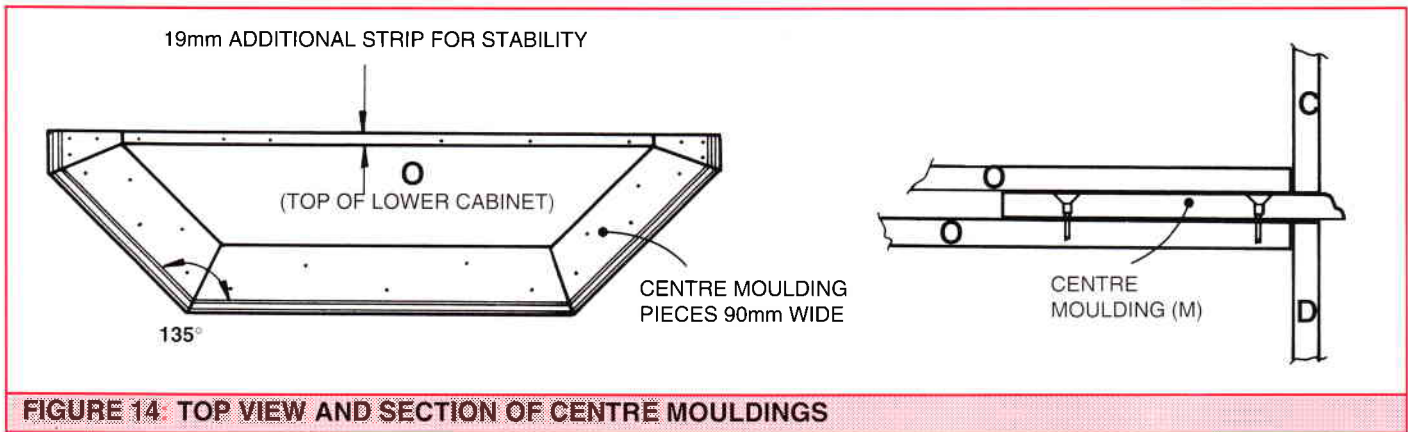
TOP VIEW AND SECTION OF CENTRE MOULDINGS
